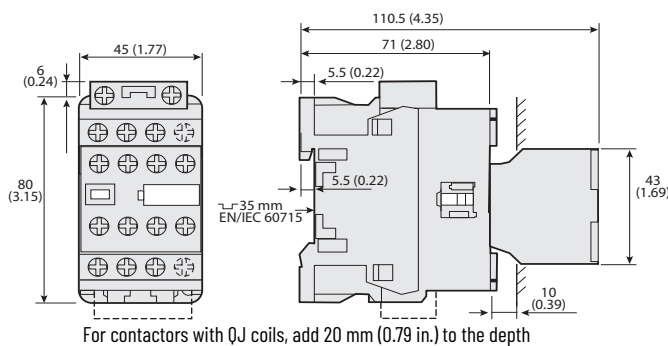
100-E09...100-E16 Contactors with Low-consumption Coils and Side-mounted Auxiliary Contact
